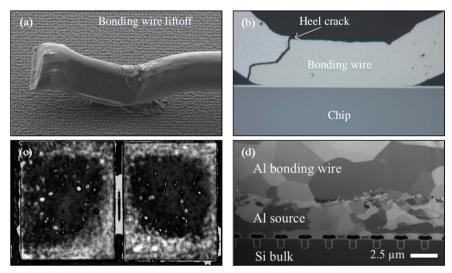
Package-level failure modes in power module: (a) bonding wire lift-off [47];(b) bonding wire fracture [48]; (c) chip solder edge delamination [49]; (d) Al metallization reconstruction [50].
